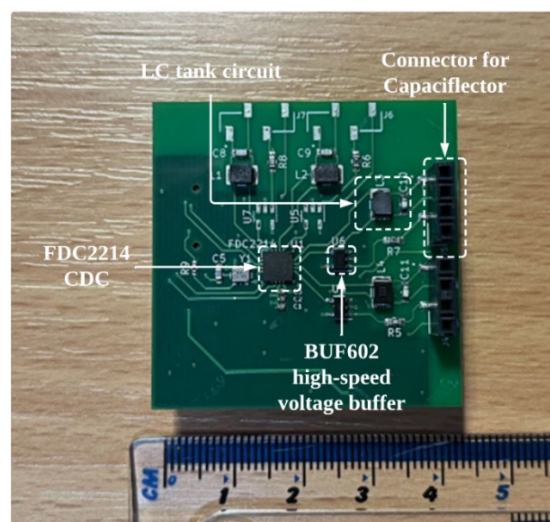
Capacitance-to-digital converter module PCB (manufactured by JLCPCB).
